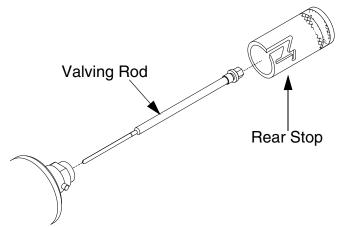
Remove Valving Rod (GX-7A and GX-7 400 models)
